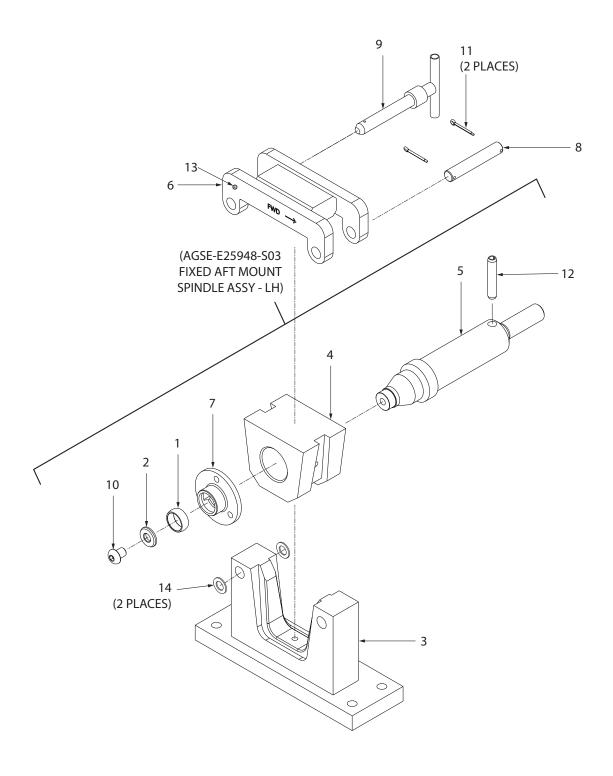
Fixed AFT Mount Assembly - LH
